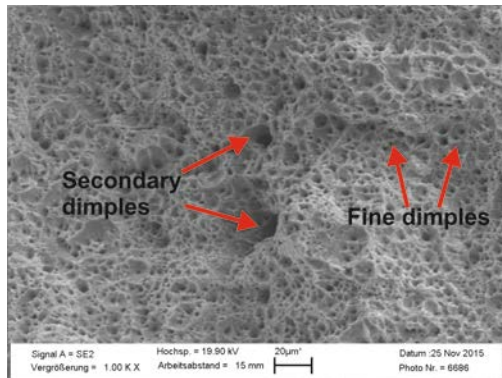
A selected SEM fractograph showing high magnification fracture surface of toughness test sample.
